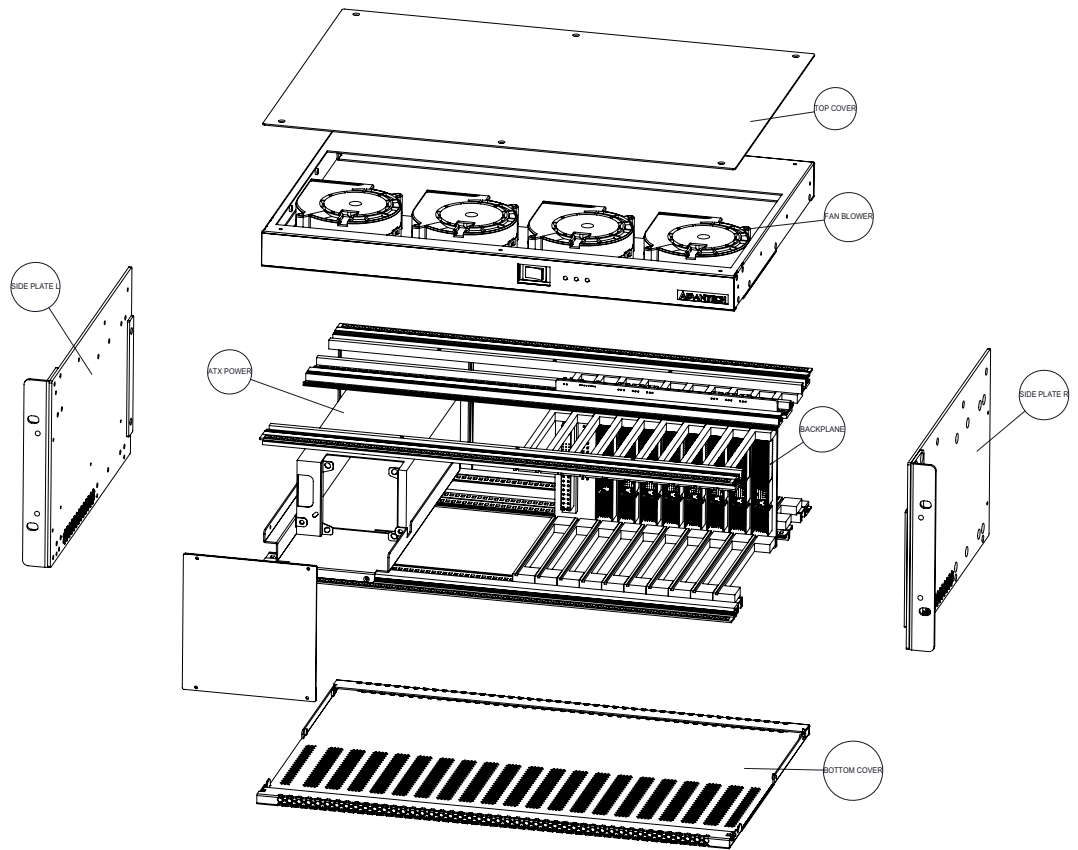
MIC-3022 with ATX Power Supply Explosion View
